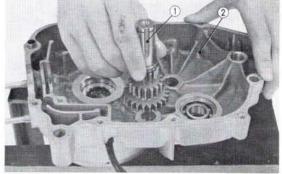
① Transmission mainshaft ② R. crankcase
